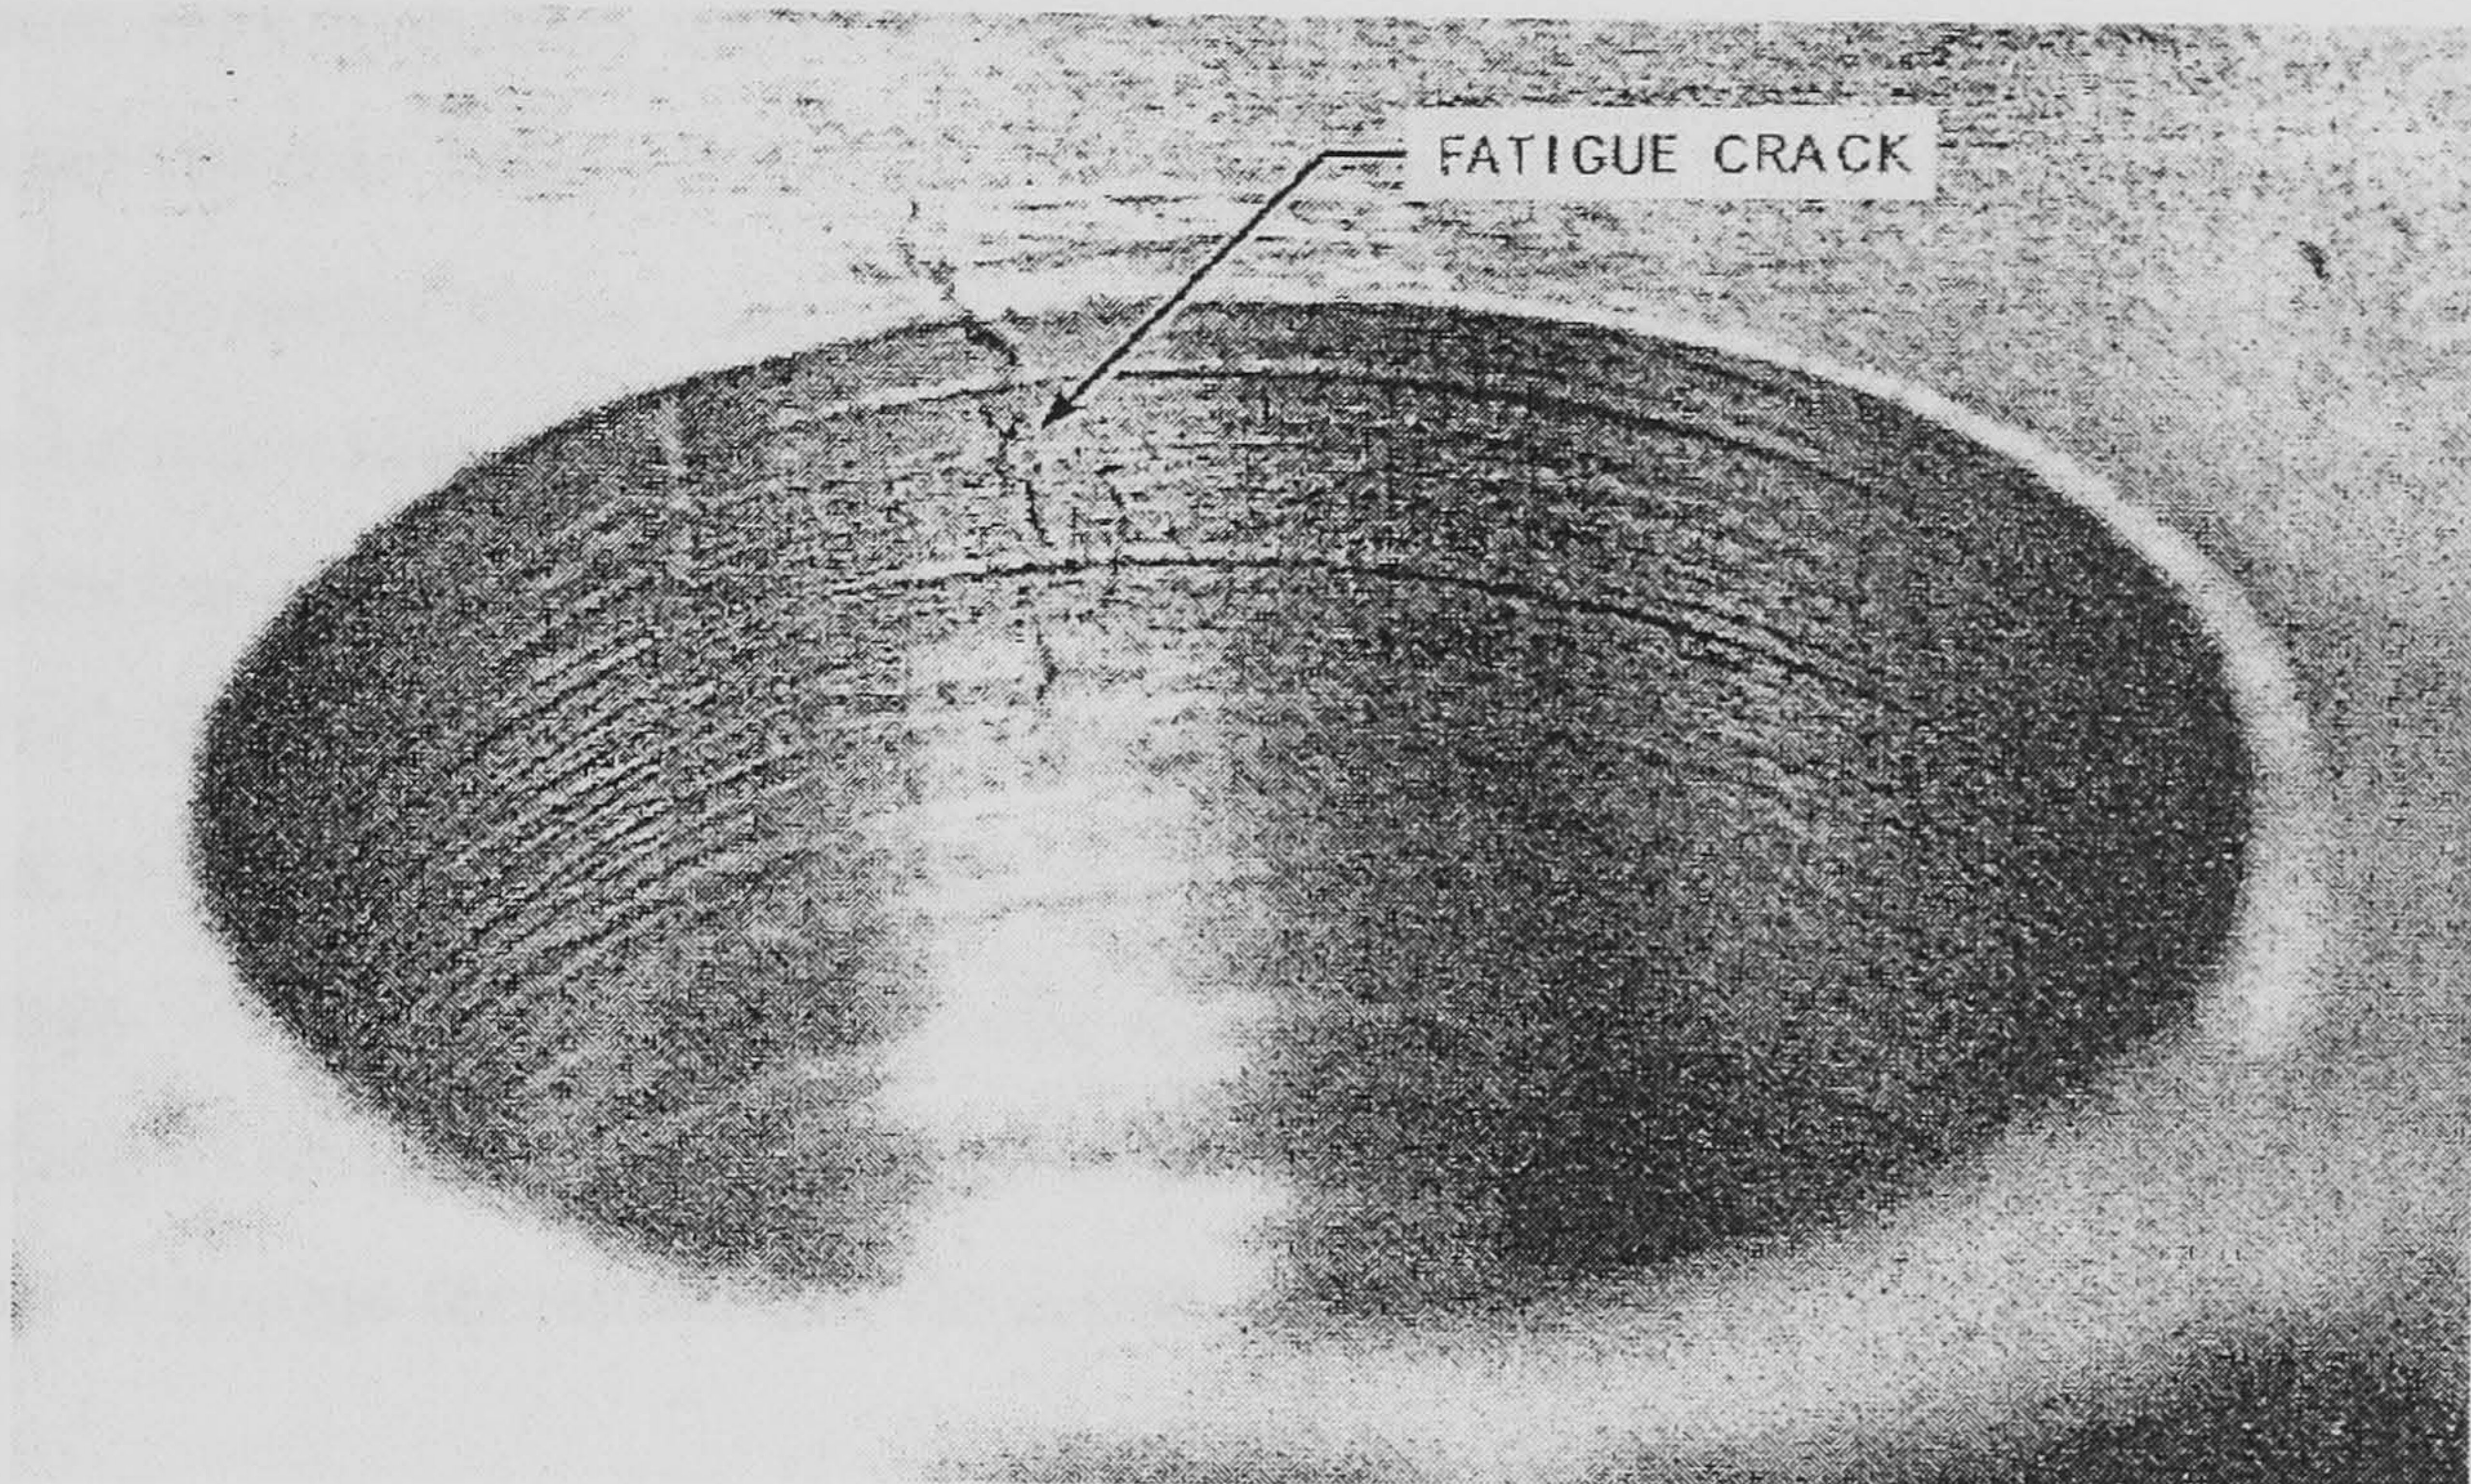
shows typical fatigue crack found in fastener hole of a wing skin^[30].
